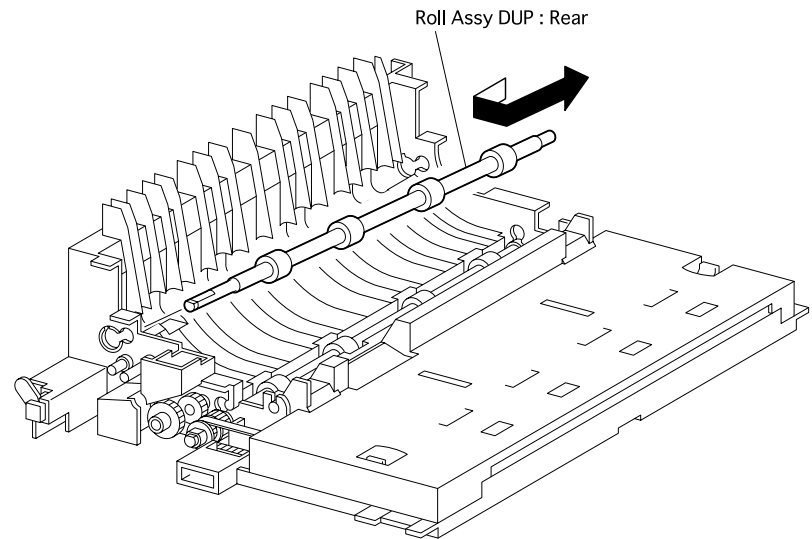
Roll Assy DUP: Rear Removal (3)
